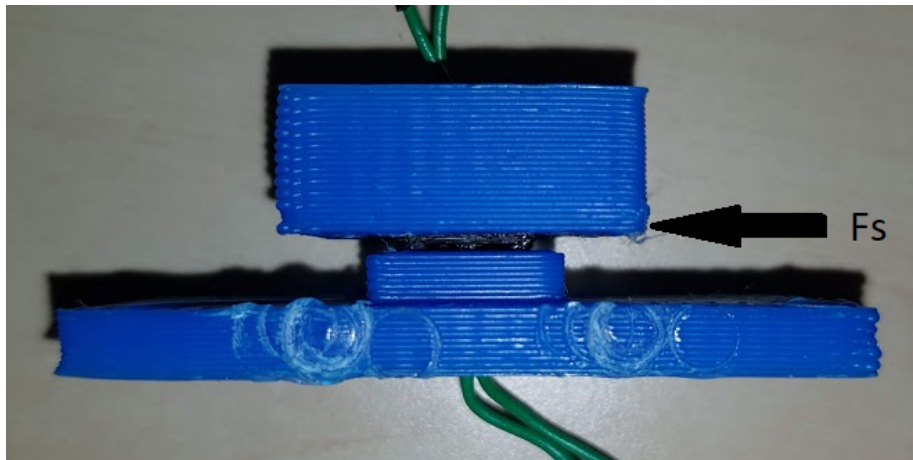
The application of horizontal force is shown using both the bottom and top layer holders.
